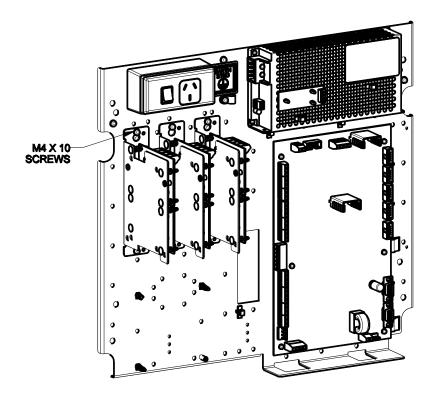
FP1027 Bracket Mounting Positions on an 8U MX1 Gear Plate
